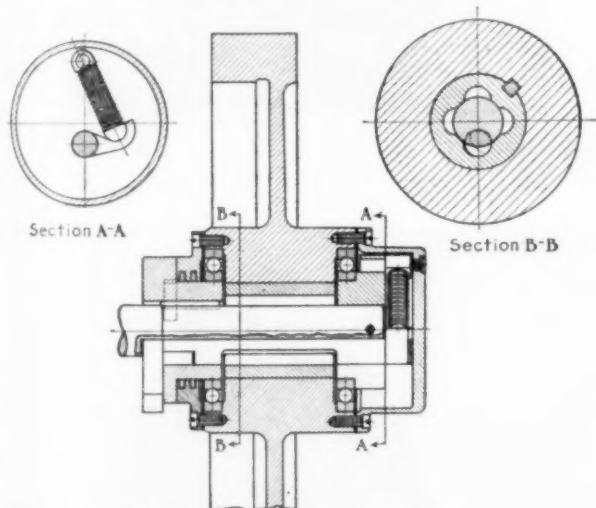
SECTION THROUGH FLYWHEEL AND CLUTCH, PUNCH PRESS
